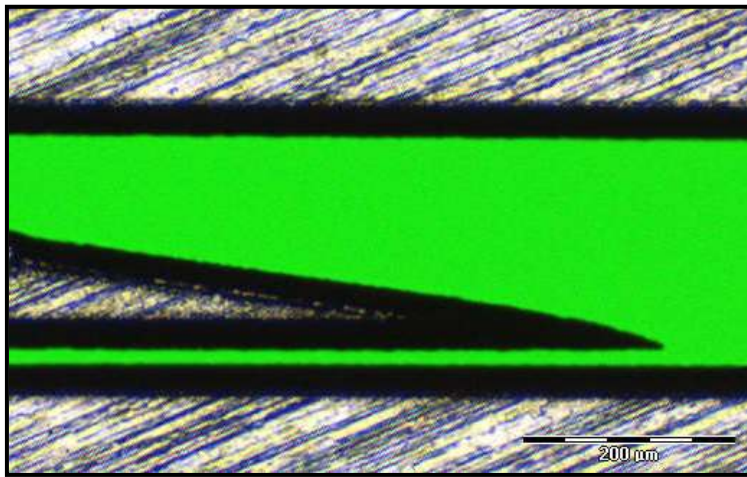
Sharp angles were machined into this 316 stainless steel sheet (50 μm thick).
